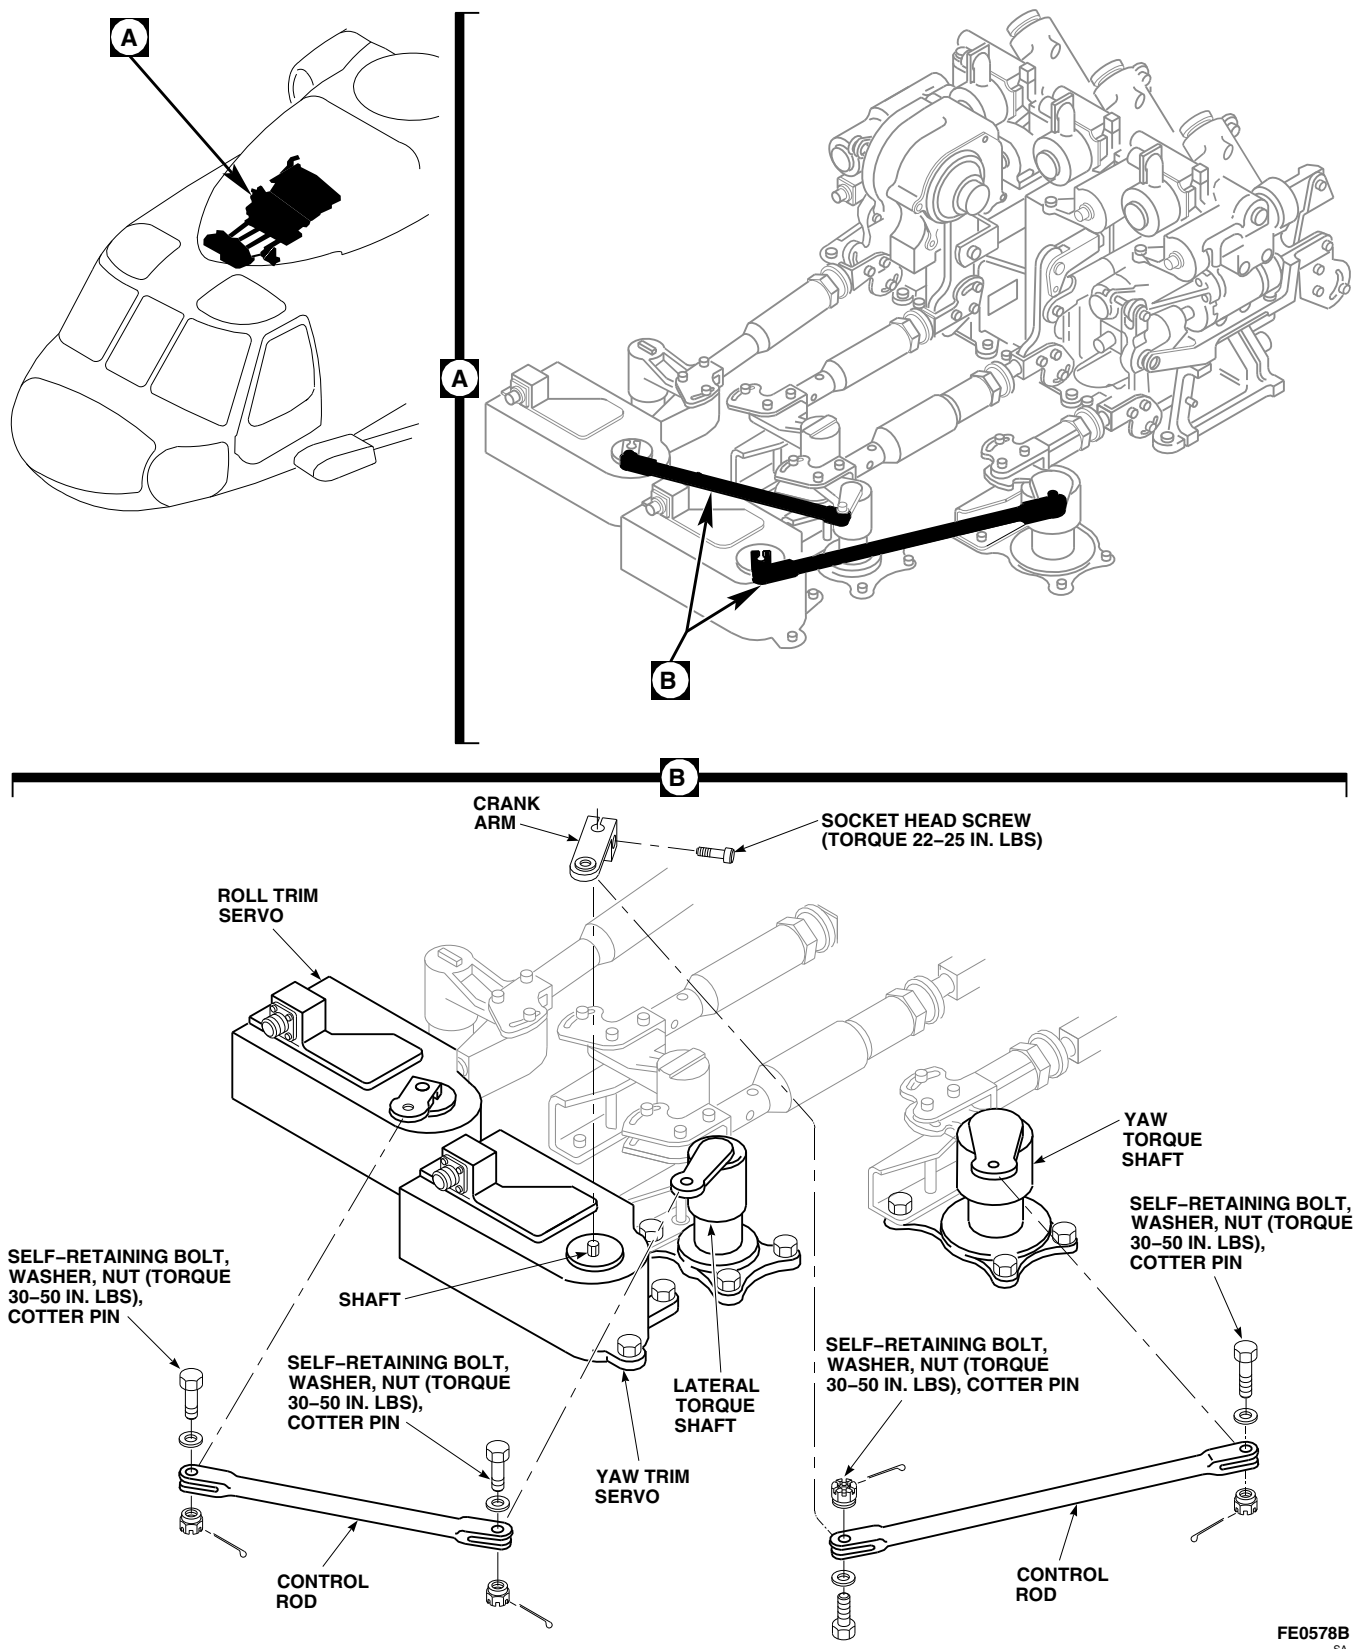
REPLACE TRIM SERVO CONTROL ROD
